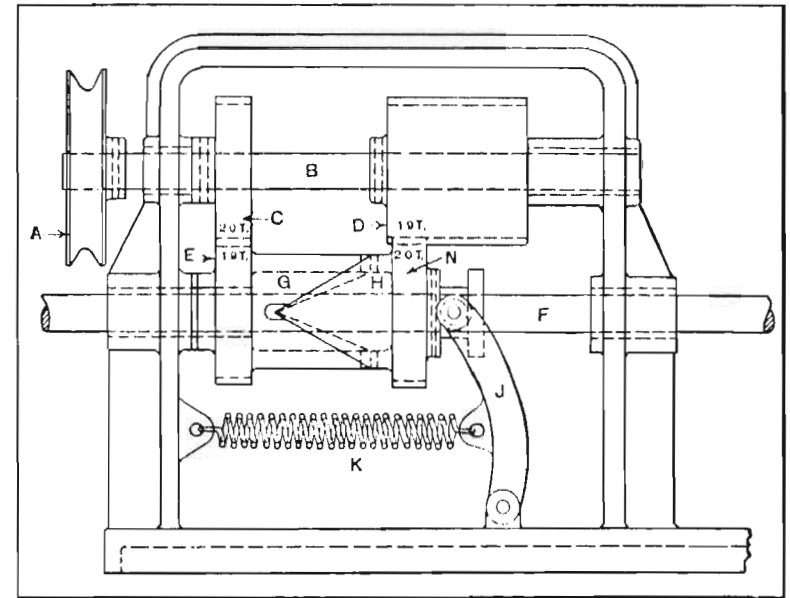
Mechanism which Imparts an Even Reciprocating Motion to a Rotating Shaft
